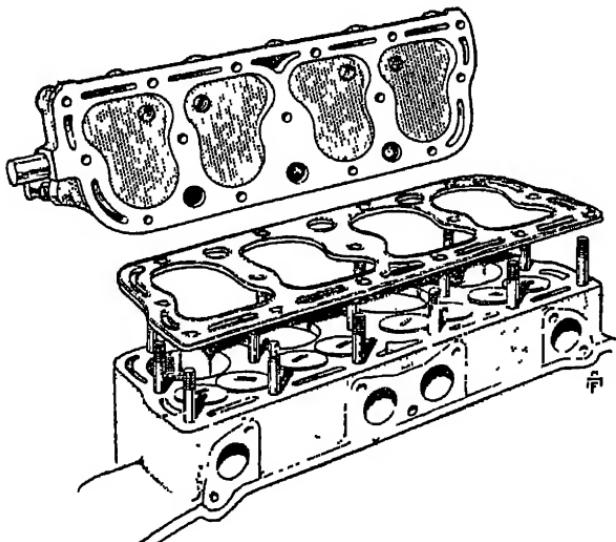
DETACHABLE CYLINDER HEAD AND GASKET
